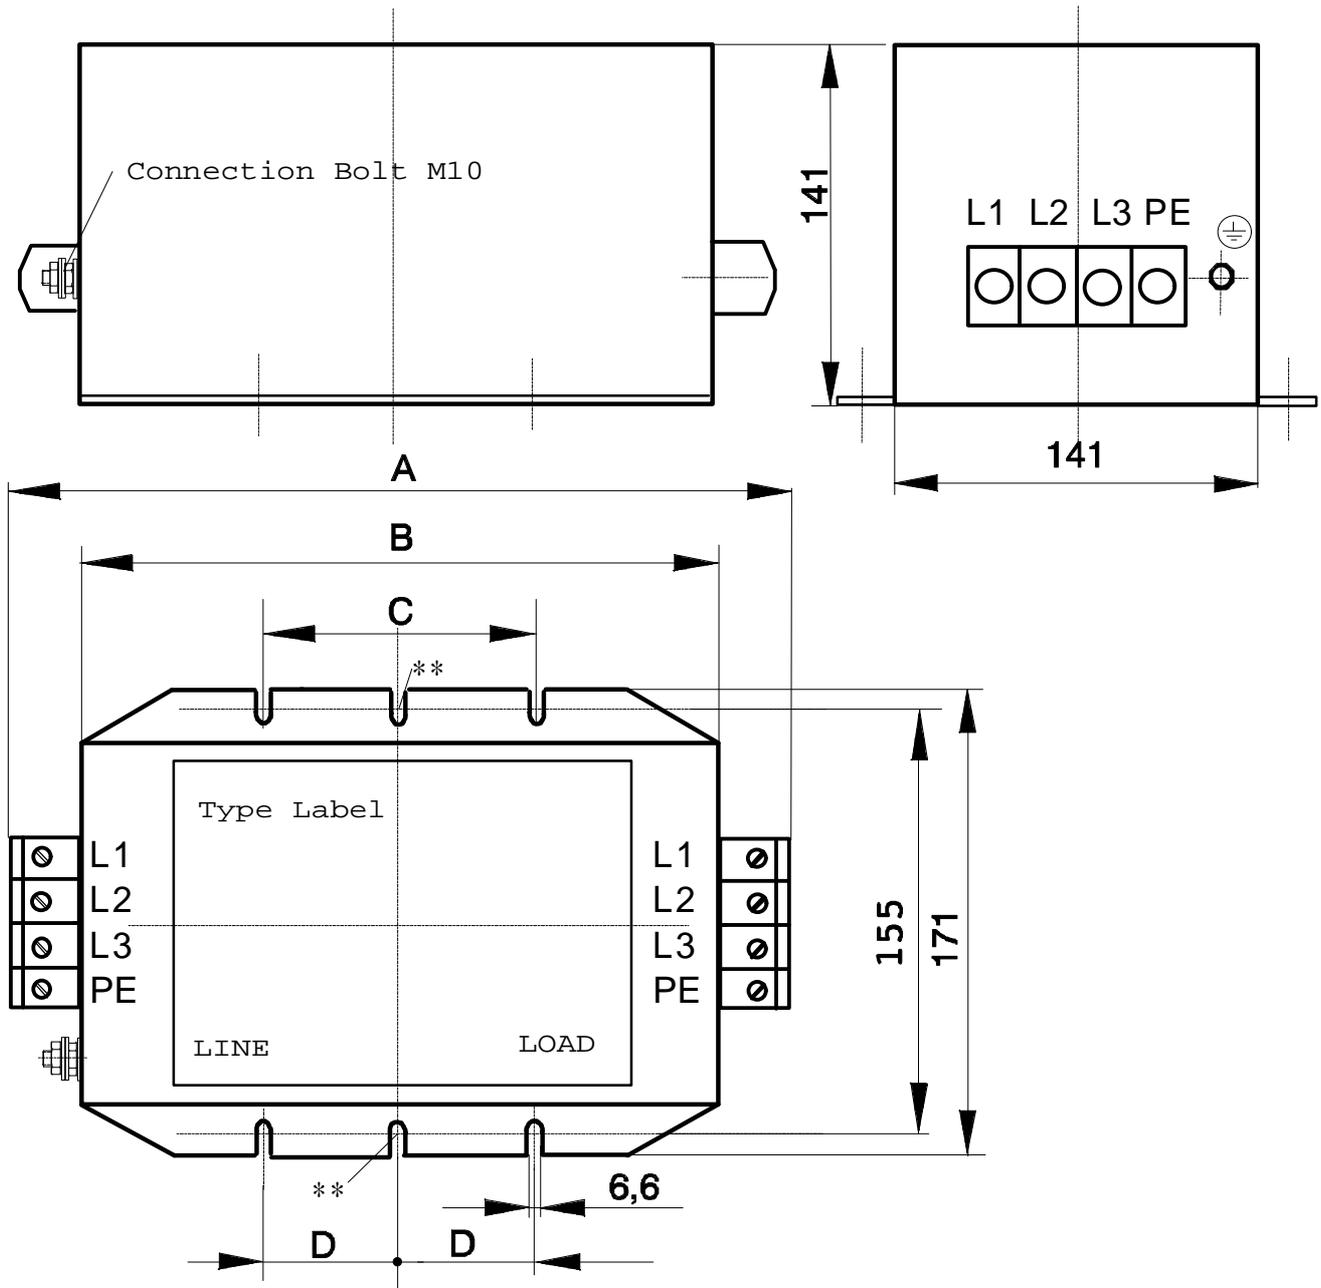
Dimension Drawing EMC filter, sizes E to F
